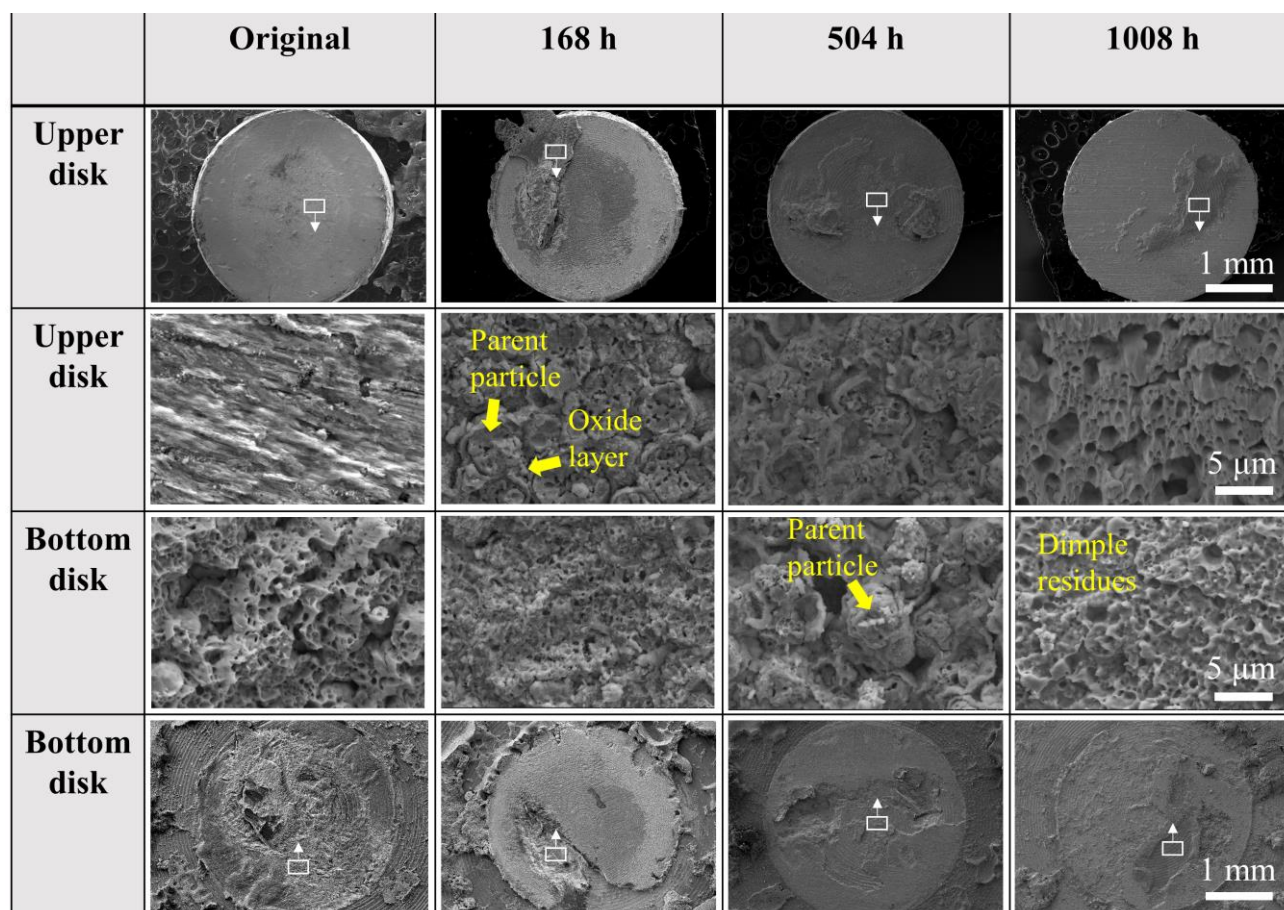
Fracture surfaces of the #4 joints after aging for different time.
